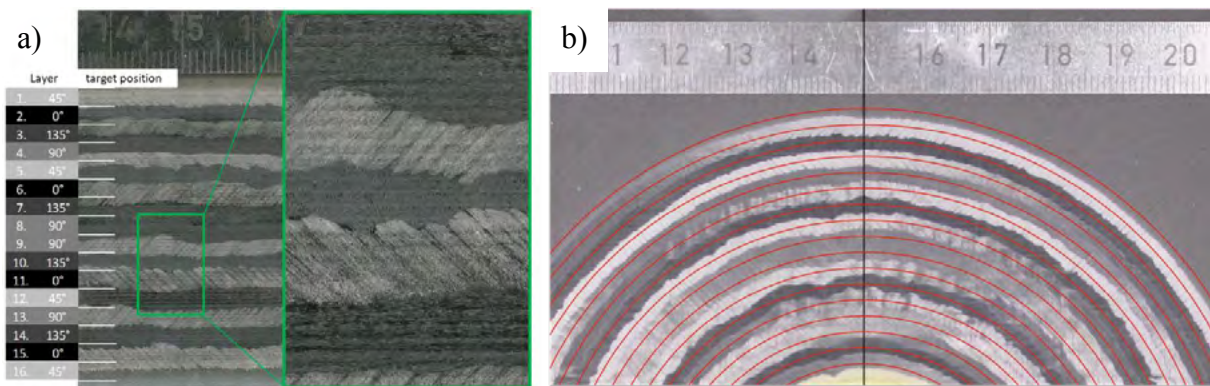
Deviations in scarfing pattern, a) EN6066, b) 2,5D specimen
